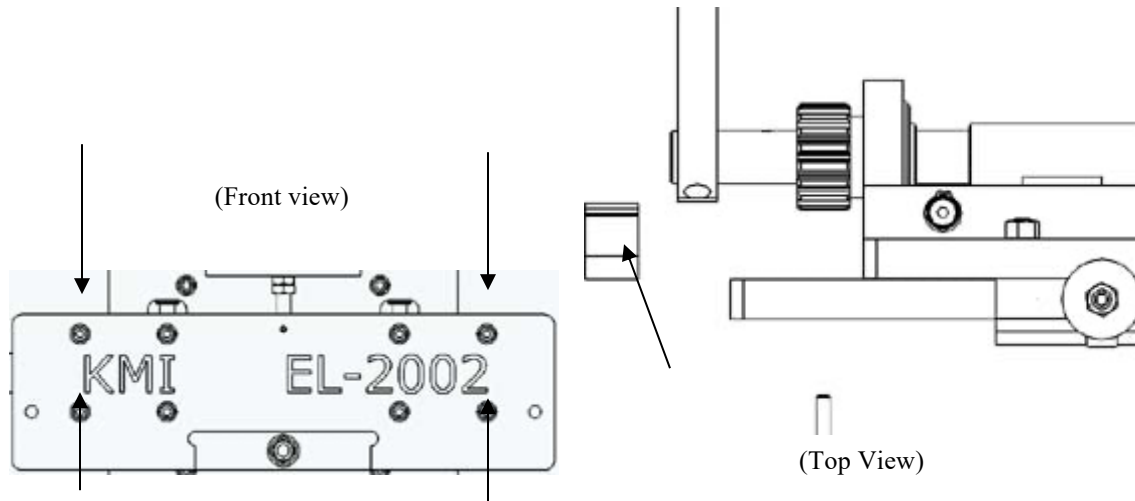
Removing the four outermost screws (left) will allow for the removal of the rack gear and the rack spacer (right). Removal of the gear/spacer on the left and right of the front plate will allow for crimp handle adjustment.
